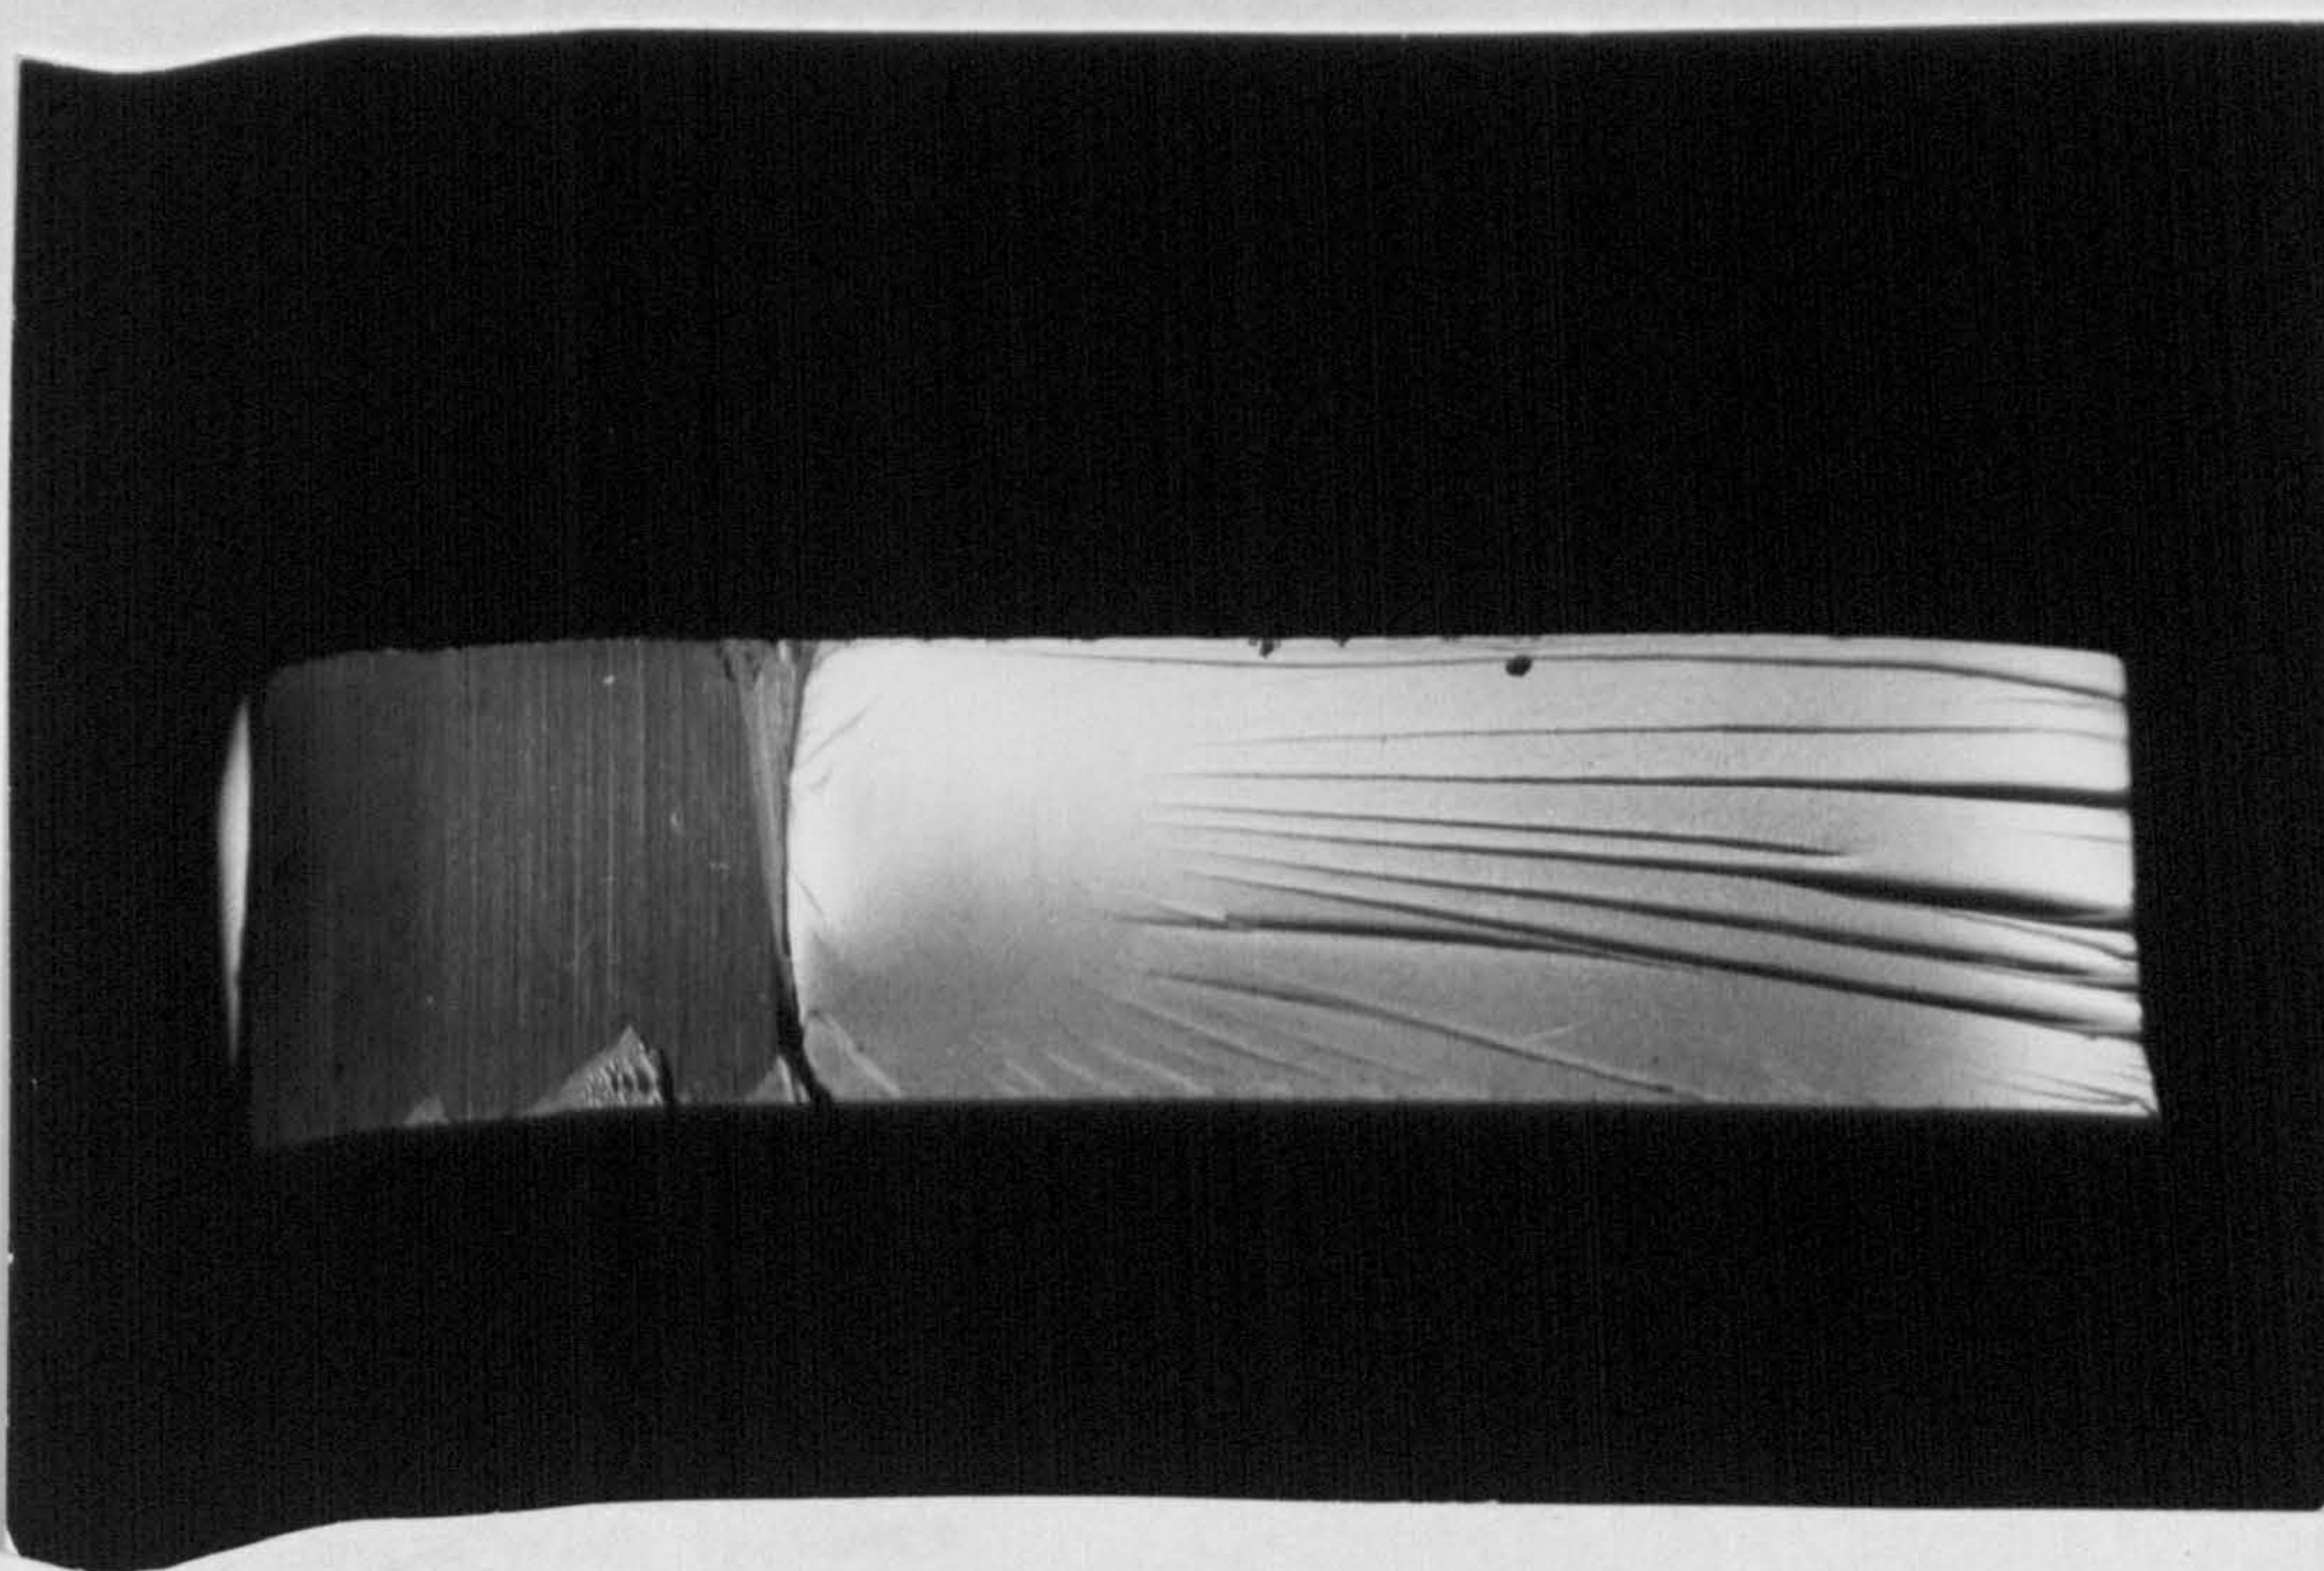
Fracture surface showing smooth surface and subsequent
